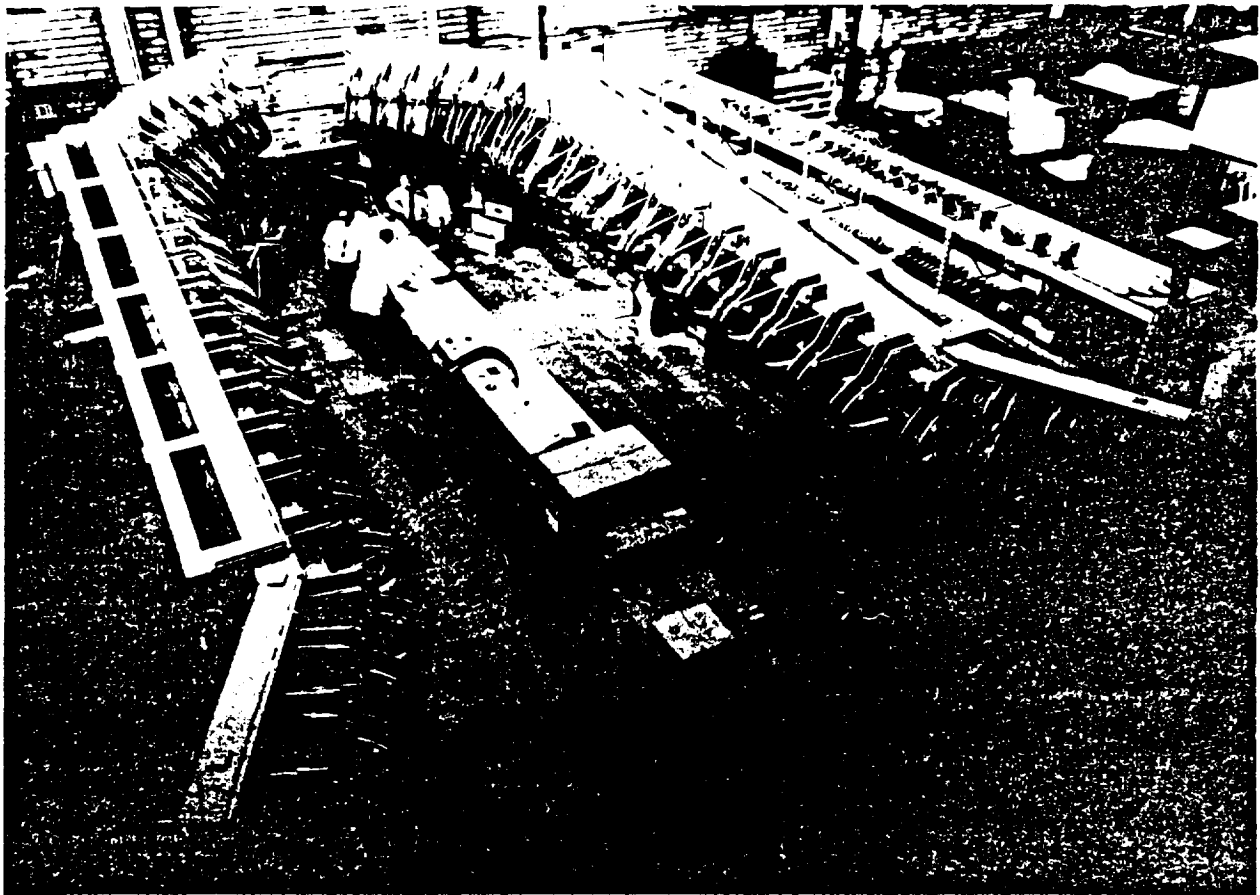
WING LEADING EDGE FINAL ASSEMBLY FIXTURE.
